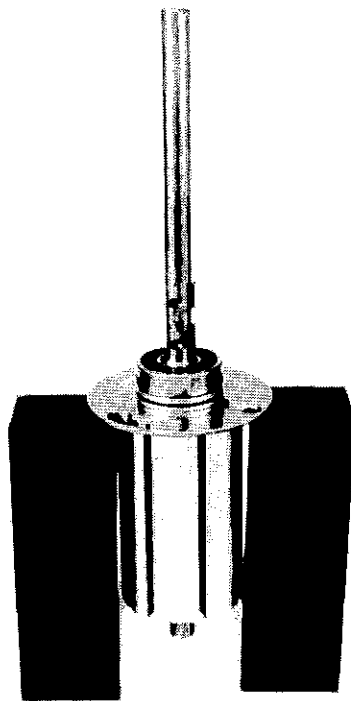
Inlet End Plate, Spacer and Bearing Removal
